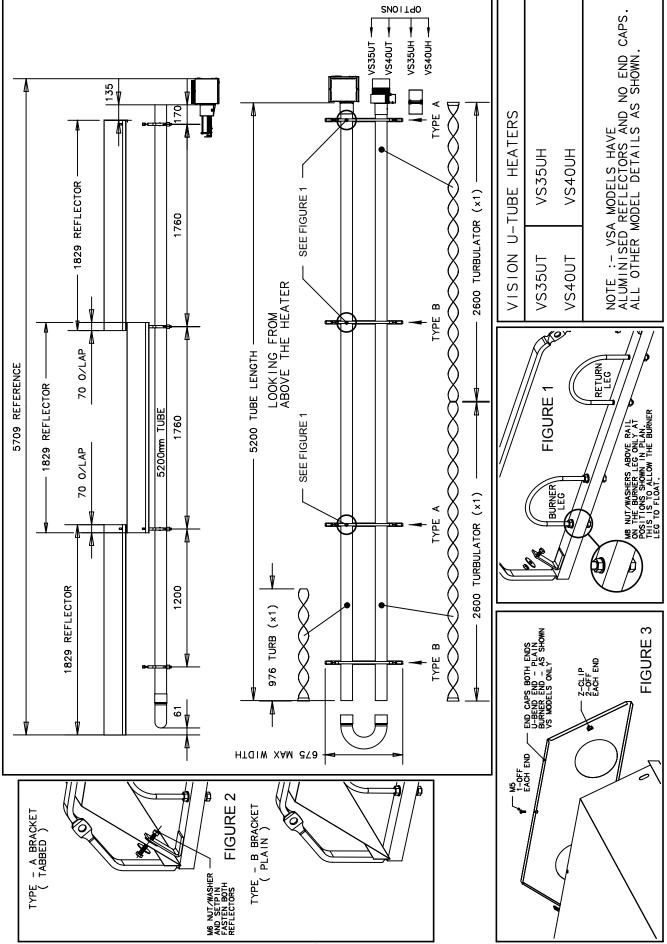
Vision Heater Assembly: Models VS/VSA U tube 35/40kW.
